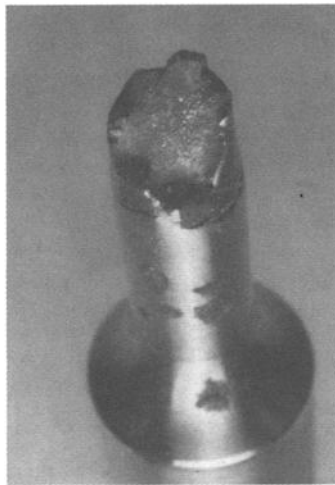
Severe sulfide stress in the SSR test, manifested by brittle fracture zones on the final fracture and secondary cracking in the gage length.
